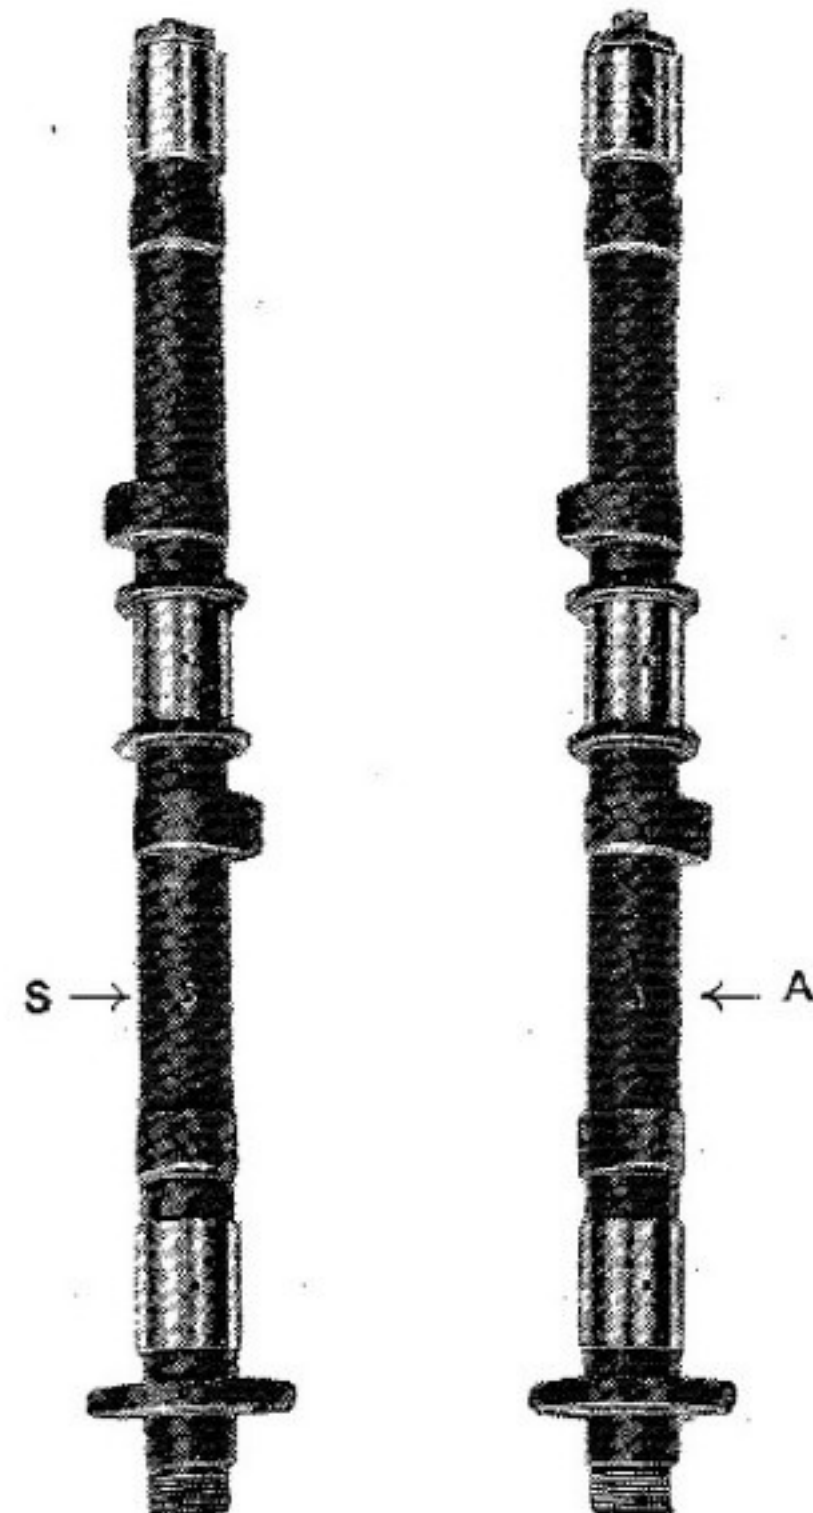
Camshafts: exhaust valve camshaft is marked S (left) and intake valve camshaft is marked A (right).
